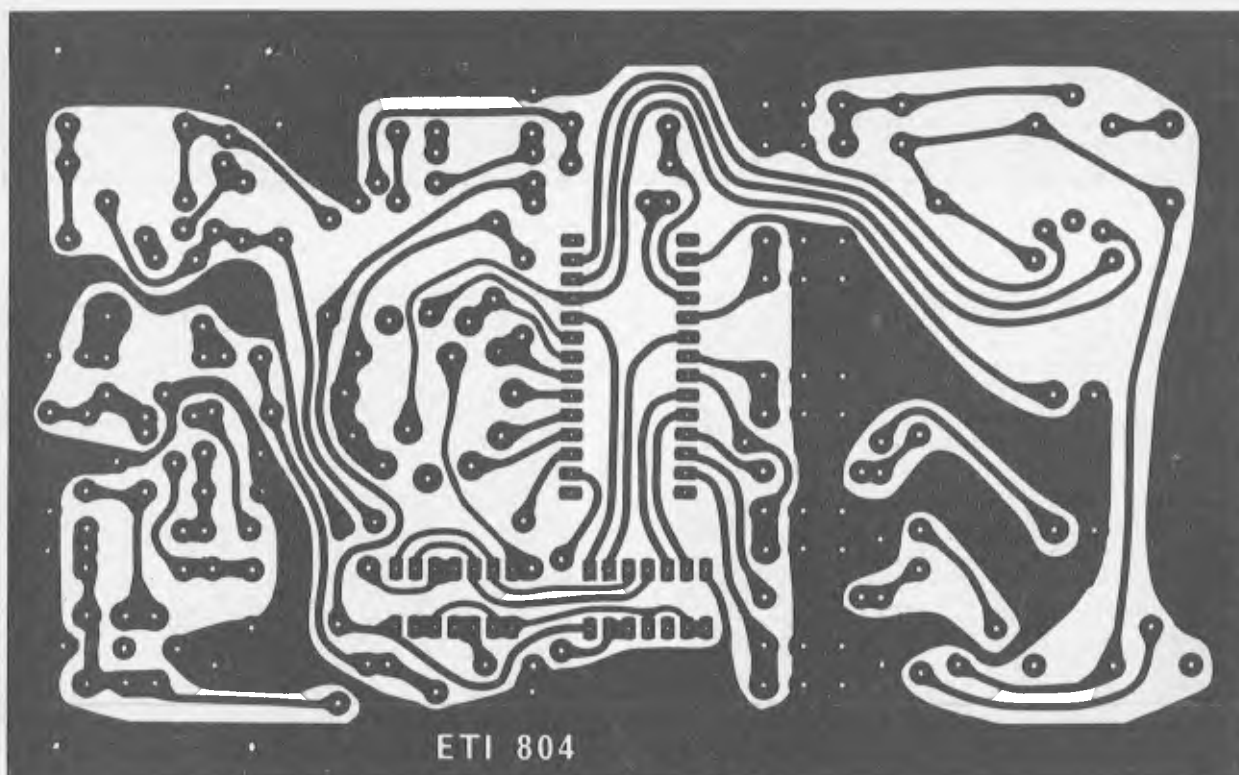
Printed-circuit layout. Full size 163mm x 102mm.
